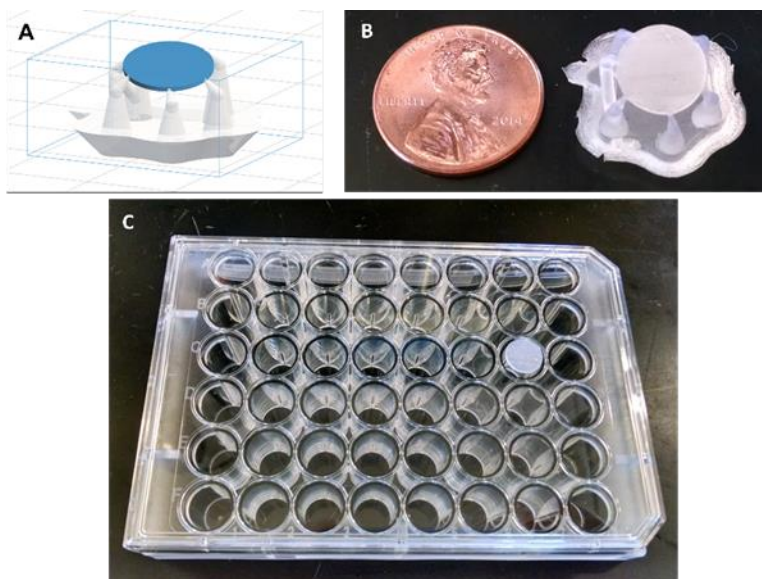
(A) CAD drawing of 9.5 mm diameter, 0.5 mm thickness disk with support scaffolding as showing in Preform software; (B) printed disk before removal of supports; and (C) disk with supports removed and edges sanded placed on top of a 48-well plate for scale.
